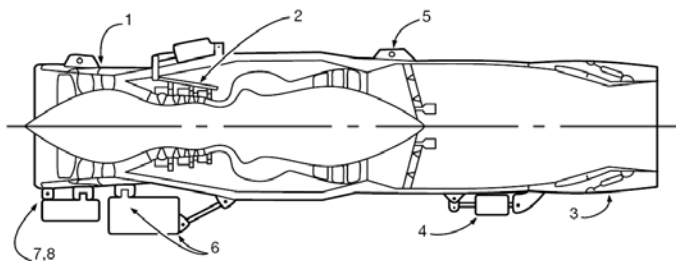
Spherical bearings application in turbofan engine: 1) Fan, variable geometry actuator bearings, 2) Compressor, variable geometry actuator bearings, 3) variable nozzle, actuator bearings, 4) thrust reverser and blocker door actuator and support bearings, 5) engine mounts, 6) gearbox mounts, 7) oil tank mounts, 8) oil cooler mounts
